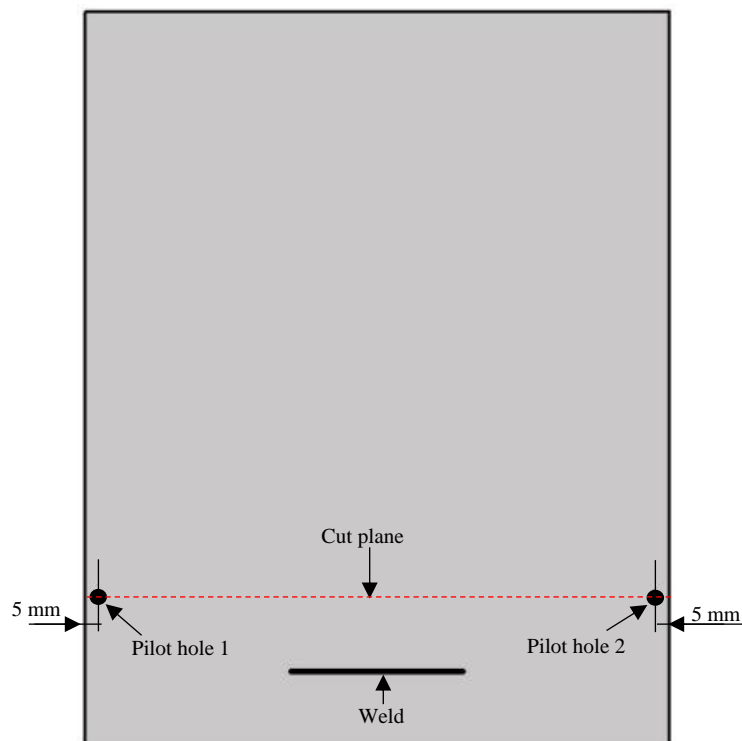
Schematic drawing of one of the benchmark test specimens illustrating self-constrained cutting strategy.
